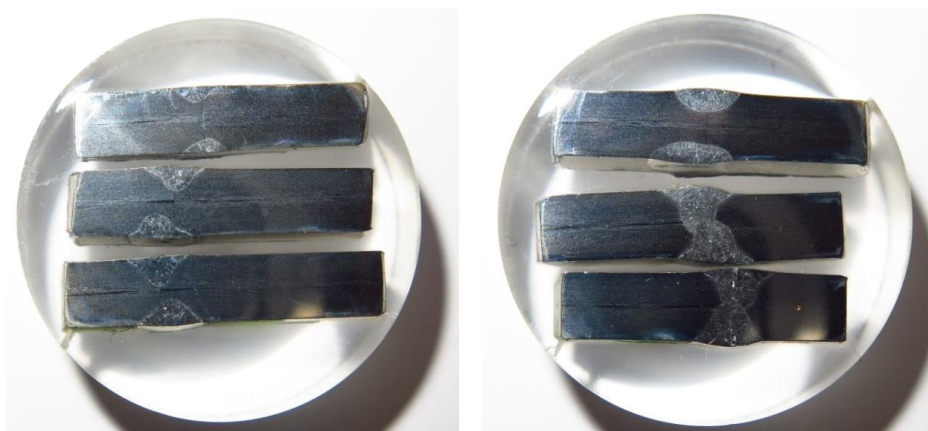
Macro-sections of weld joints welded by current 80 A; (a) TIG-1, (b) ATIG-B1, (c) ATIG-Z1 and macro-sections of weld joints welded by curr. 100 A; (a) TIG-2, (b) ATIG-B2, (c) ATIG-Z2
